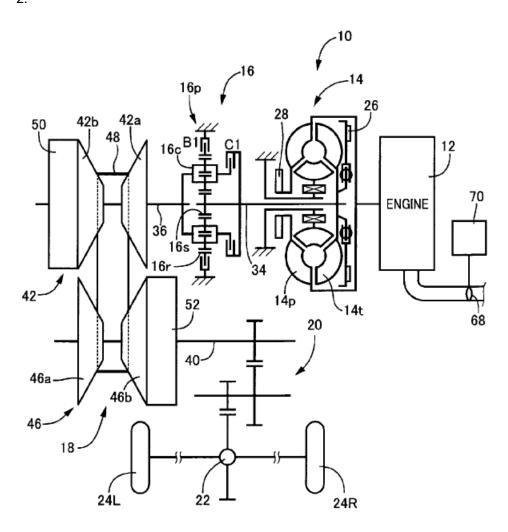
illustrates a combination of mechanical gearings including a belt-type CVT (18) and a toothed gearing comprising a planetary gear train (16). Brake (B1) is used to provide a reverse speed in planetary gear train (16).
